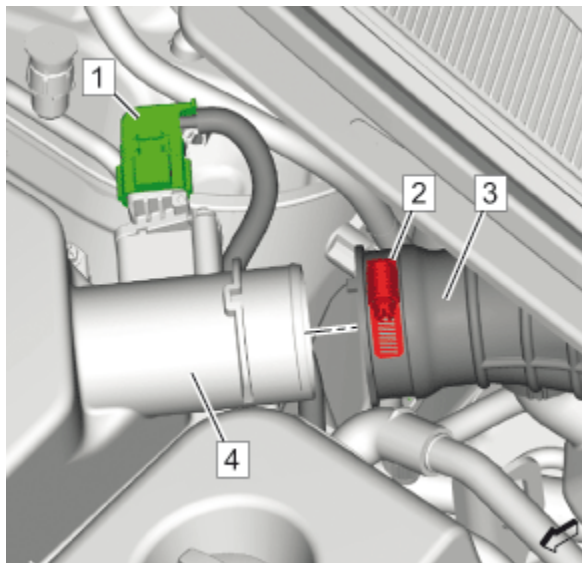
Air Cleaner Outlet Duct, Air Cleaner Assembly, Clamp And Electrical Connector
